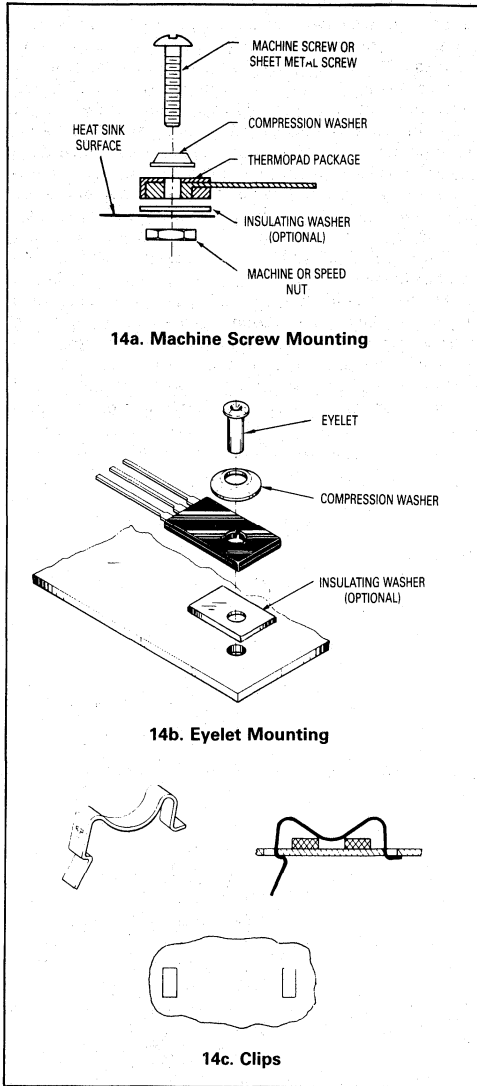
Recommended Mounting Arrangements for TO-225AA (TO-126) Thermopad Packages
